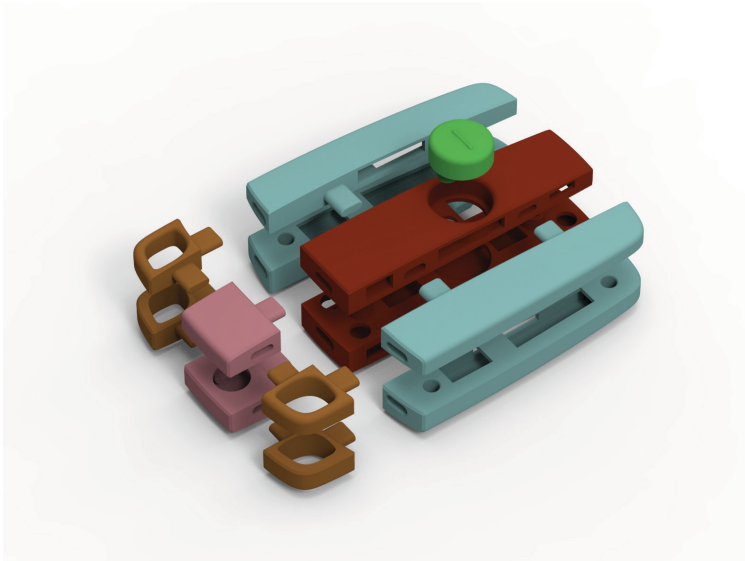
RENDER OF THE MODULAR REMOTE ASSEMBLY.
